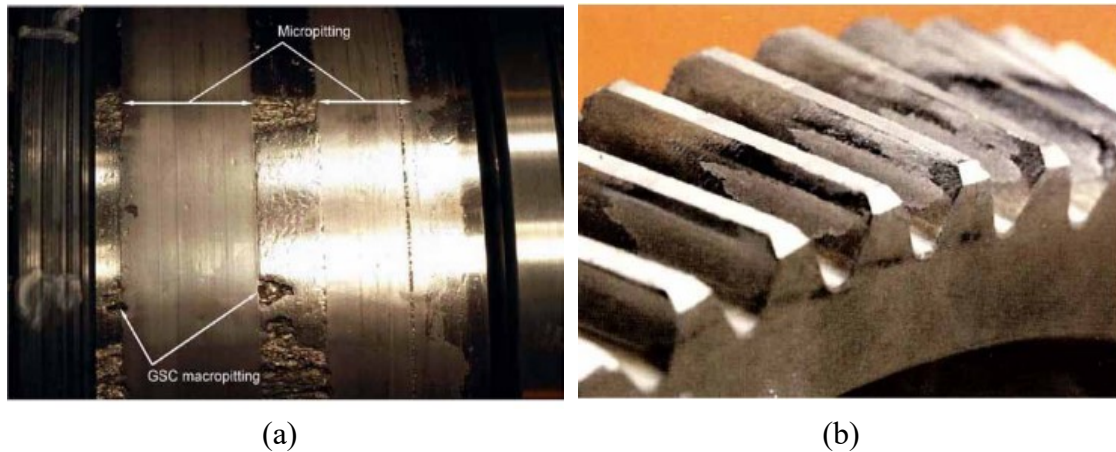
Micropitting on (a) a bearing and (b) a gear [8]
